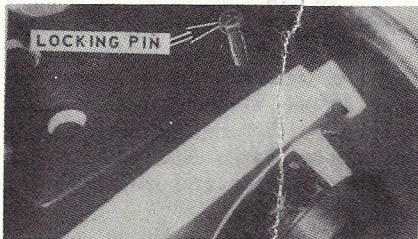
Flywheel may be locked in place on SP60, SP80, SP81, PM700 and PM850 Models by inserting 1/4-inch locking pin through base plate into notch in flywheel.
